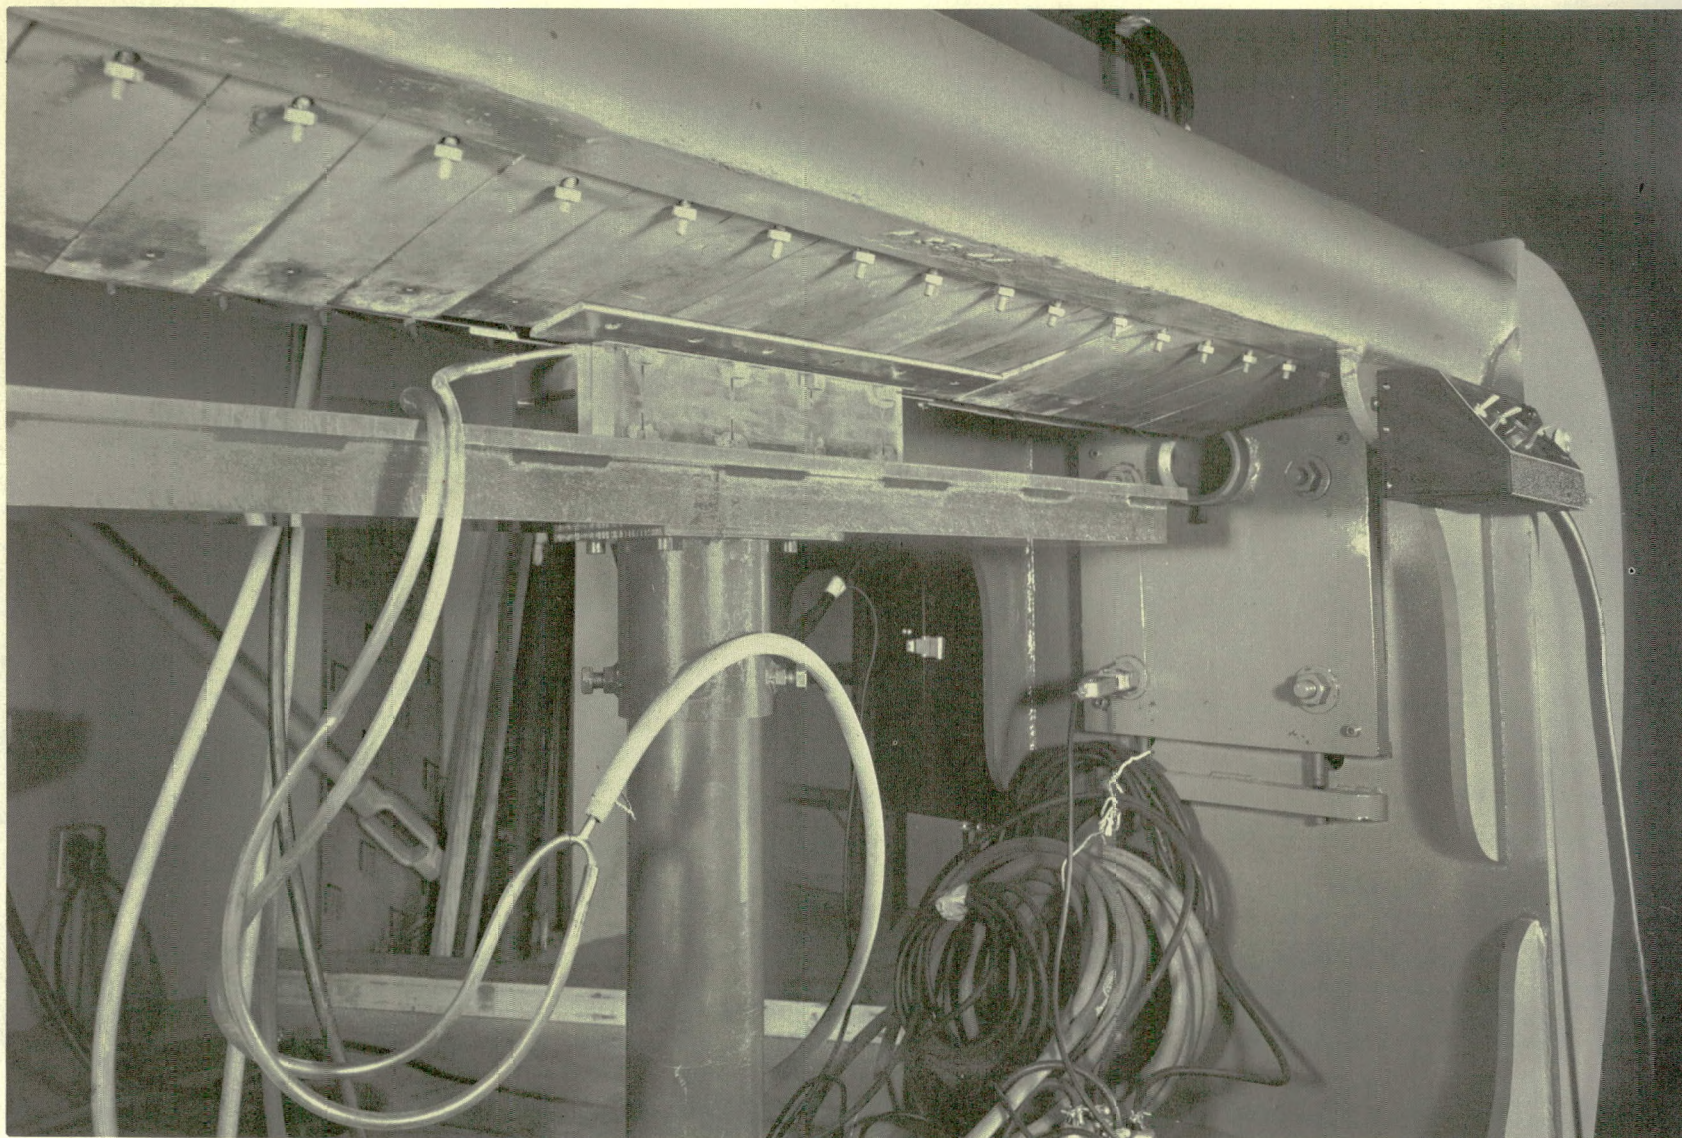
Underneath View of Welding Stake Showing 12 Inch Developmental Fuel Box Being Welded With Inert Gas Back-Up
